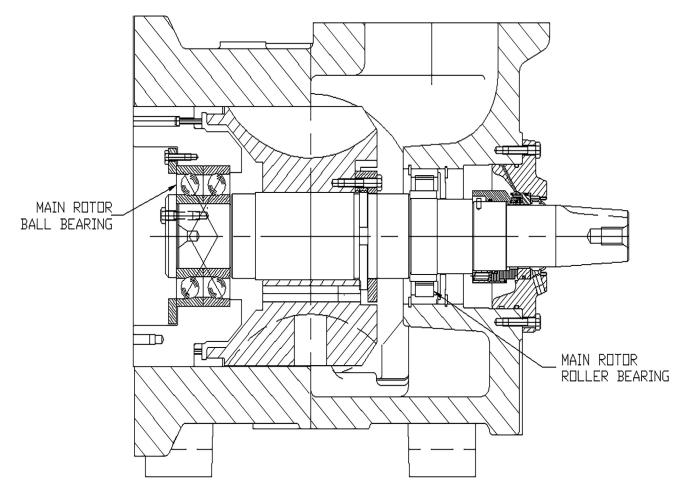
Main Rotor Cross-Section VSTC Compressors
